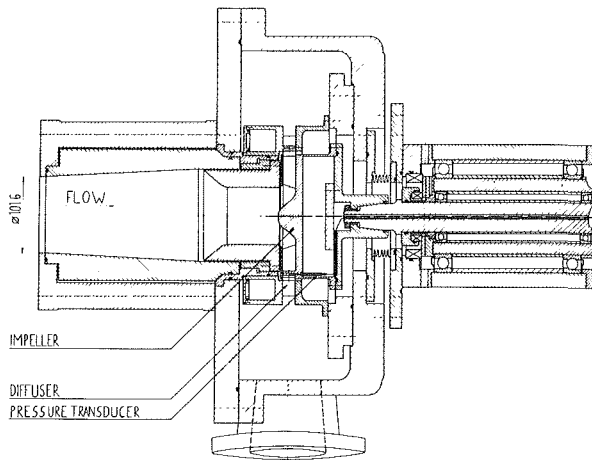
Assembly drawing of the eccentric drive system and the test section with Impeller Z2 installed
